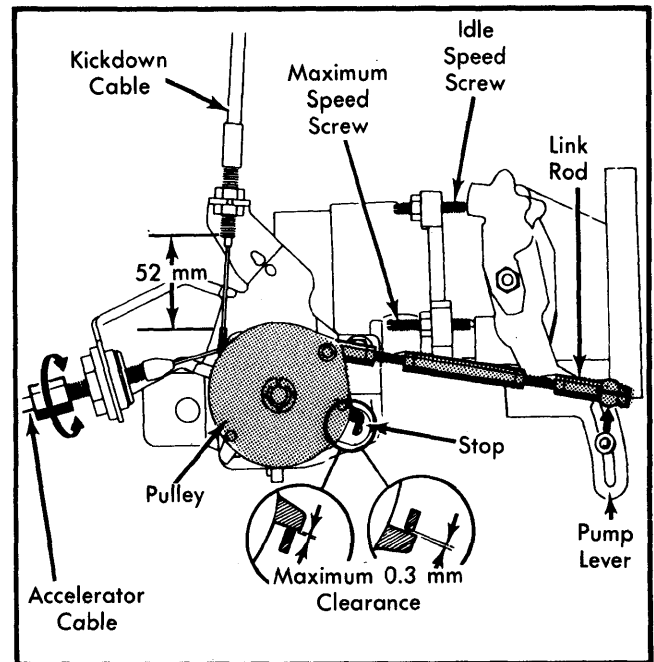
Adjusting Engine Controls (Volvo Shown)
